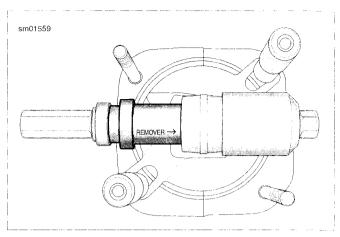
Remover Stackup. Use Remover Side Of Remover/Installer
